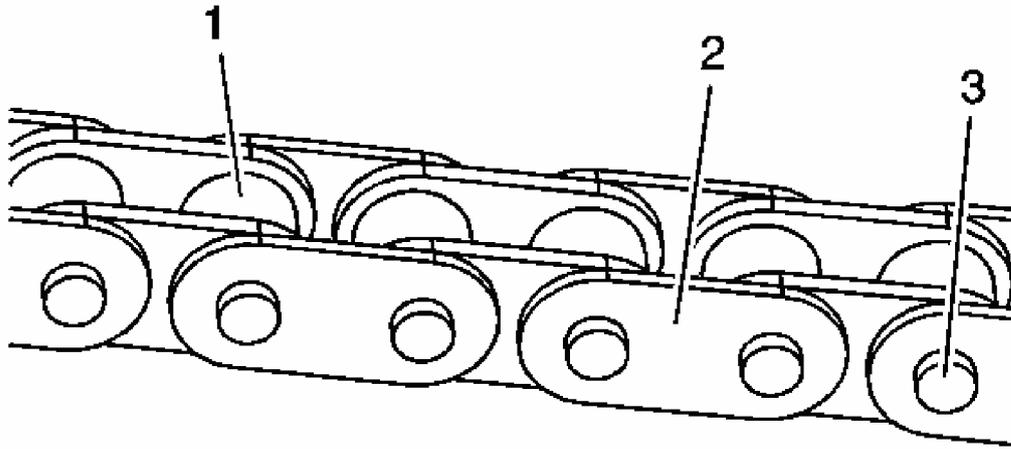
Inspecting Primary And Secondary Timing Chains With Roller Chain
